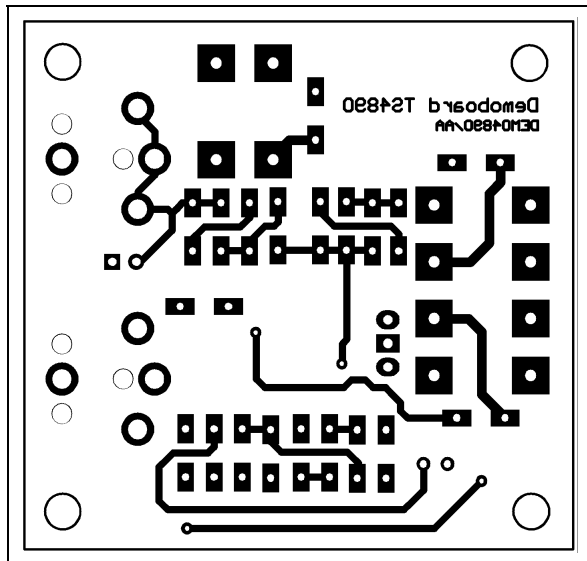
SO8 & MiniSO8 Demoboard Components Side
